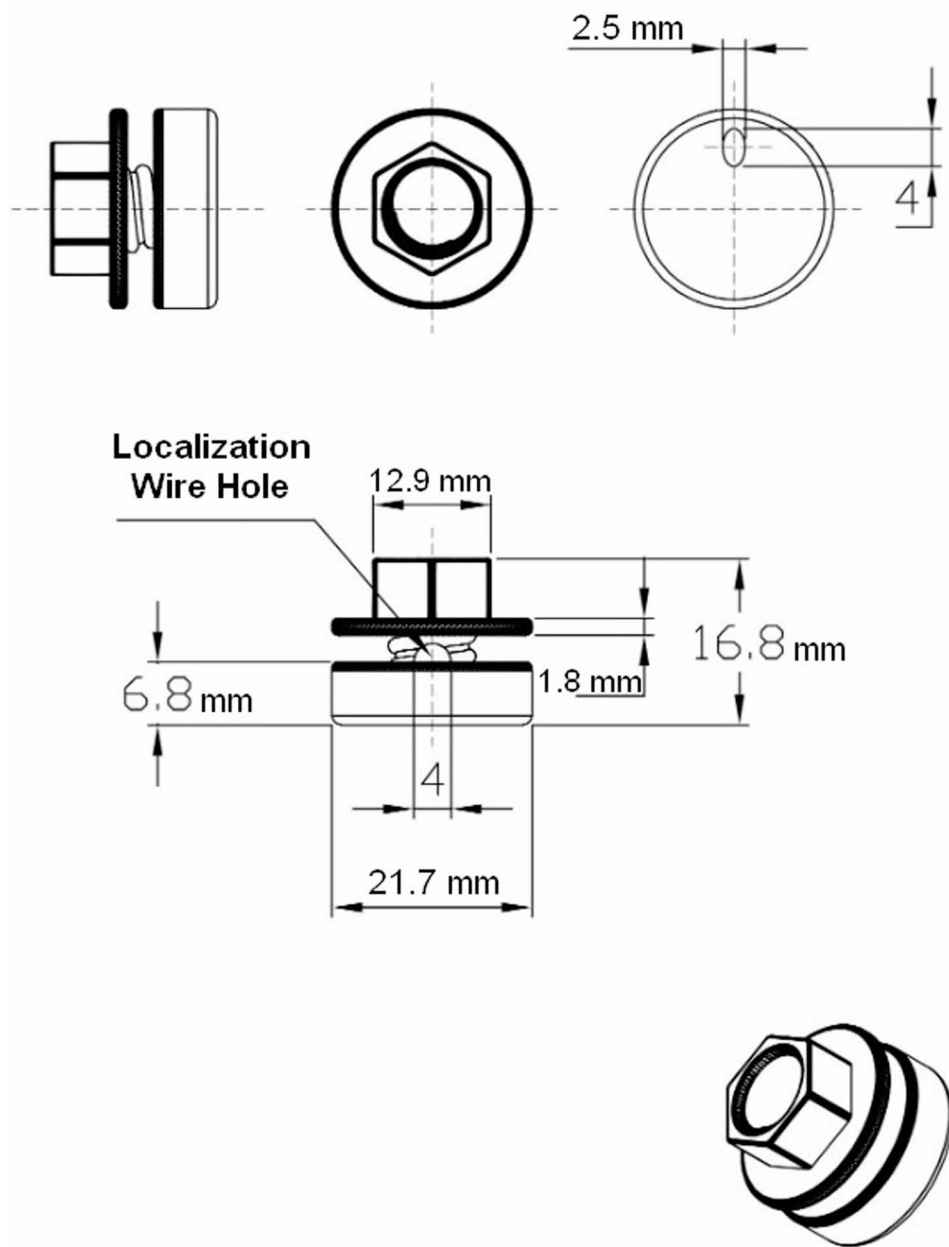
Design specifications of the screw mechanism. Technical specifications of the 3D-printed screw mechanism showing key dimensions: base diameter (21.7 mm), elliptical wire hole (2.5×4 mm), total height (16.8 mm), and threading system. The elliptical design prevents wire obstruction during removal
